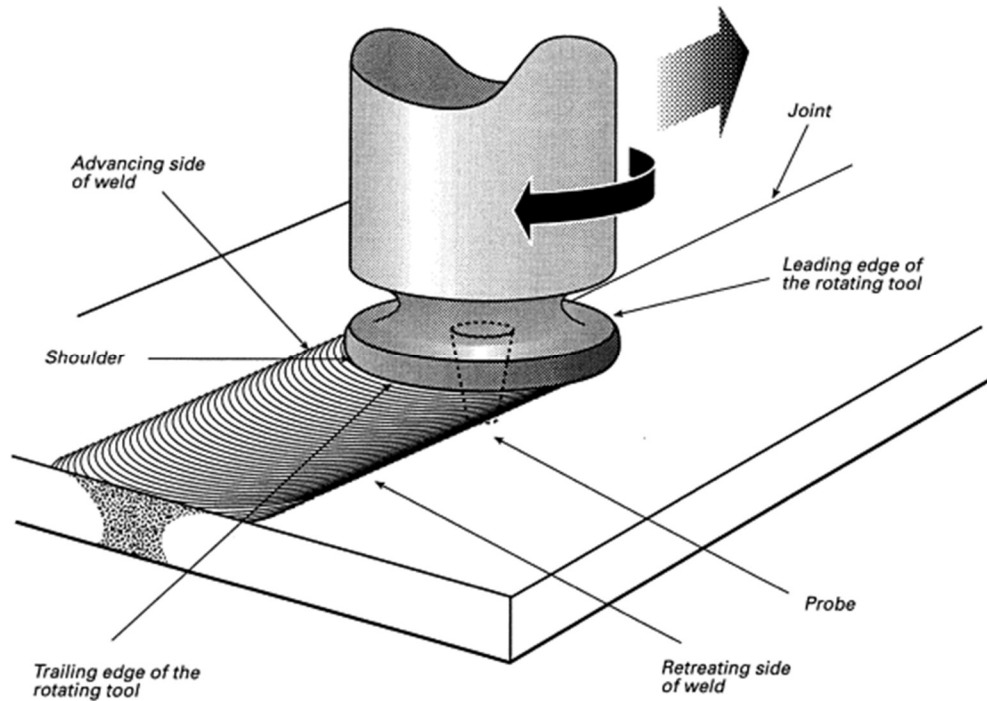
Friction Stir Welding process(Thomas and Nicholas 1997)
